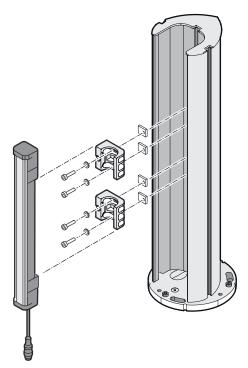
Mounting the FlexFix bracket on a device column (accessory)
